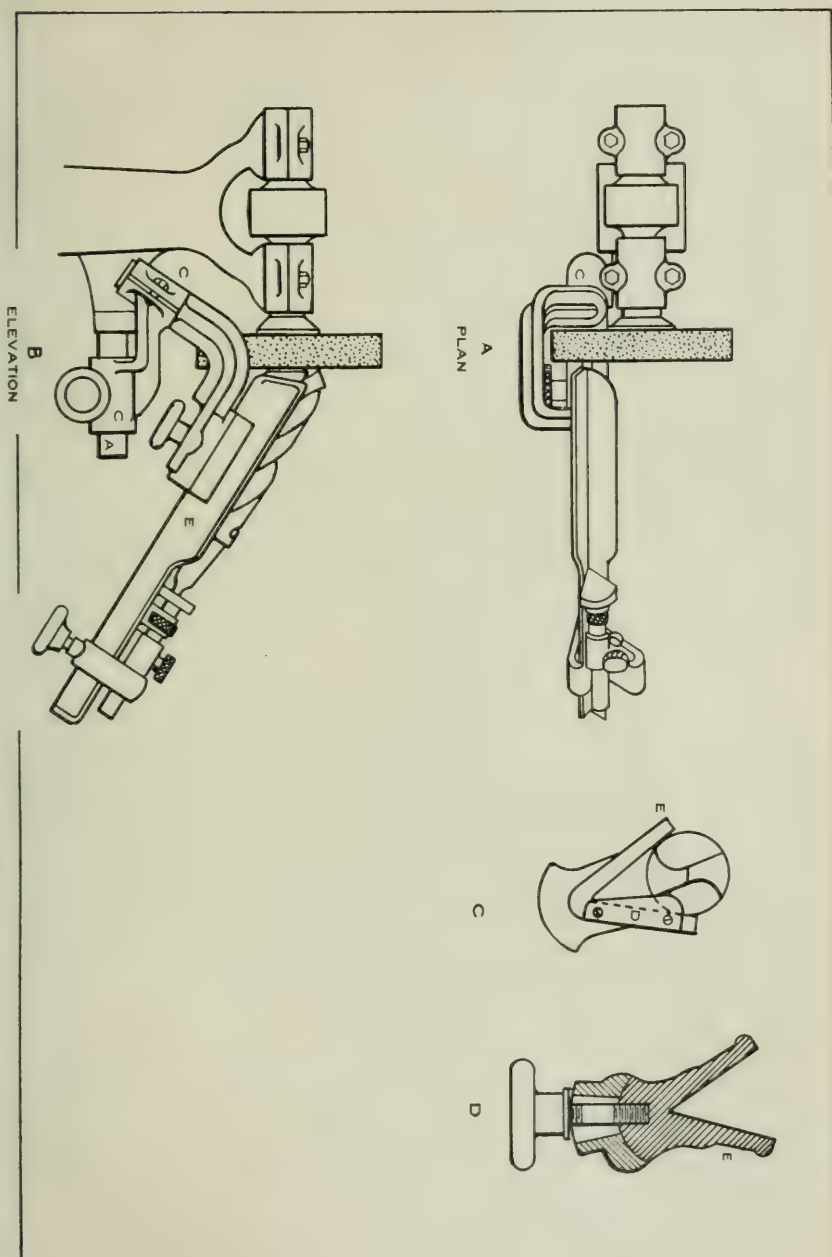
THE TYPE OF CONSTANT ADJUSTMENT DRILL GRINDER USED IN THE TESTS
